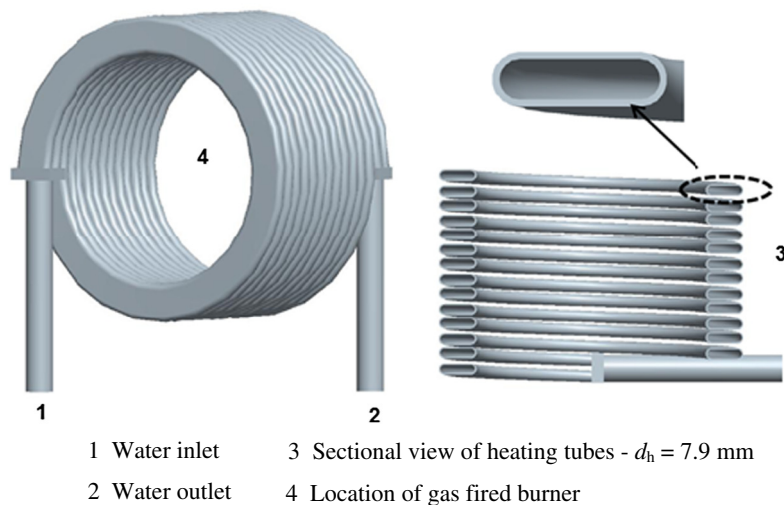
Primary heat exchanger assembly and cross-sectional view of the rectangular tube.
